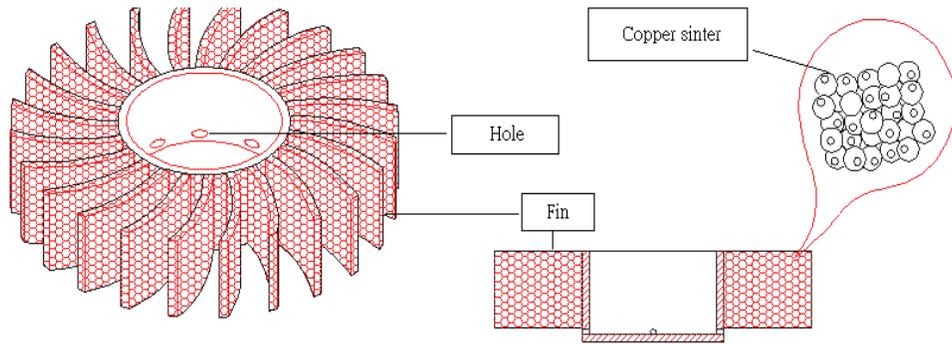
The schematic of copper bead heat sink (CBHS) and its component
